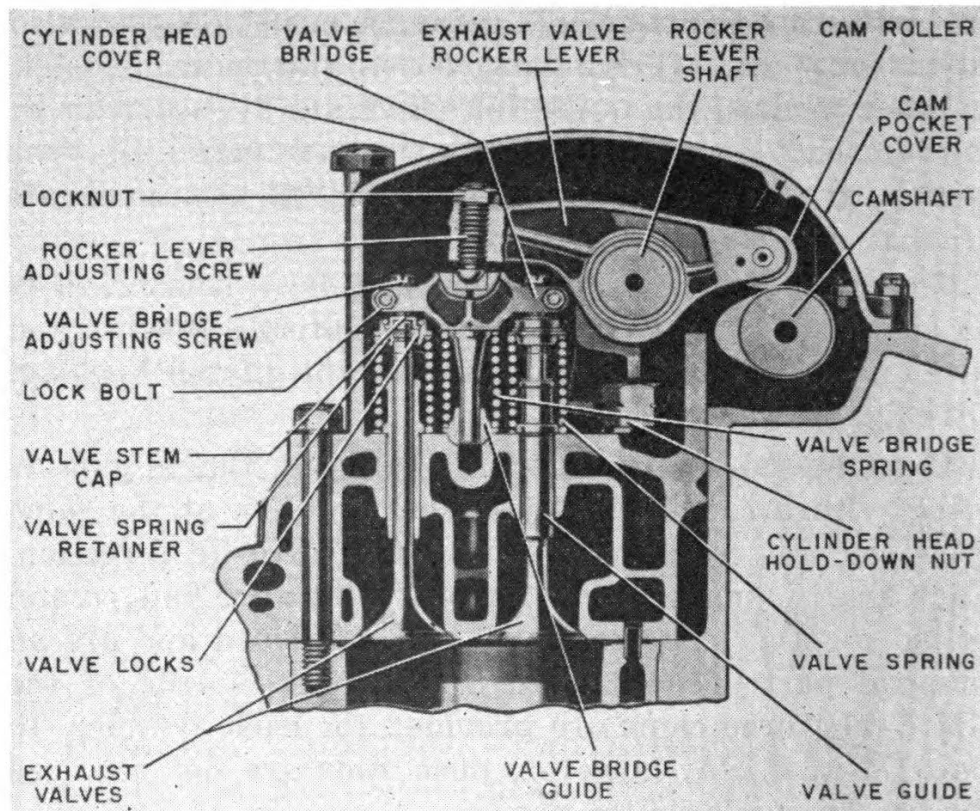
Valve-operating mechanism with valve bridge (GM 16-278A).
